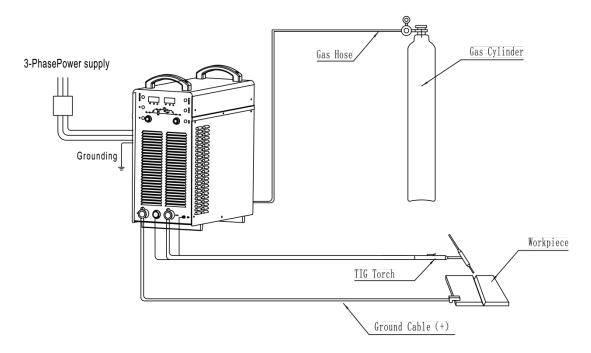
Connection and operation for water-cooling TIG welding
